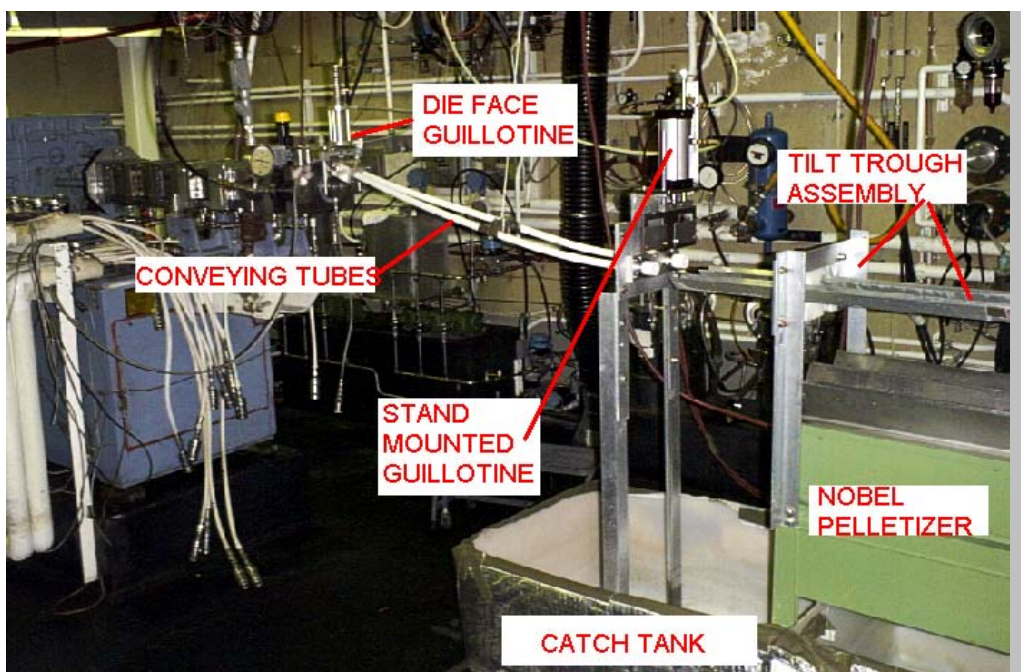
LOVA Twin-Screw Extrusion and Pelletizing Equipment Set-Up.
